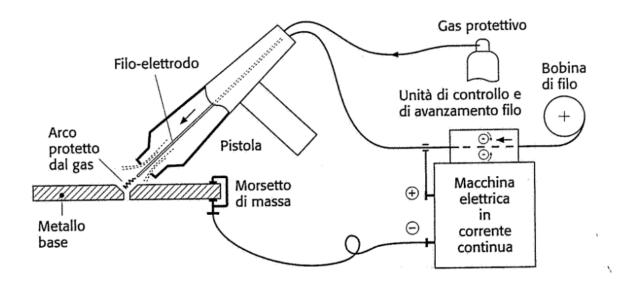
diagram of the GMAW welding setup "Tecnologia meccanica e studio di fabbricazione – Santochi, Giusti"
